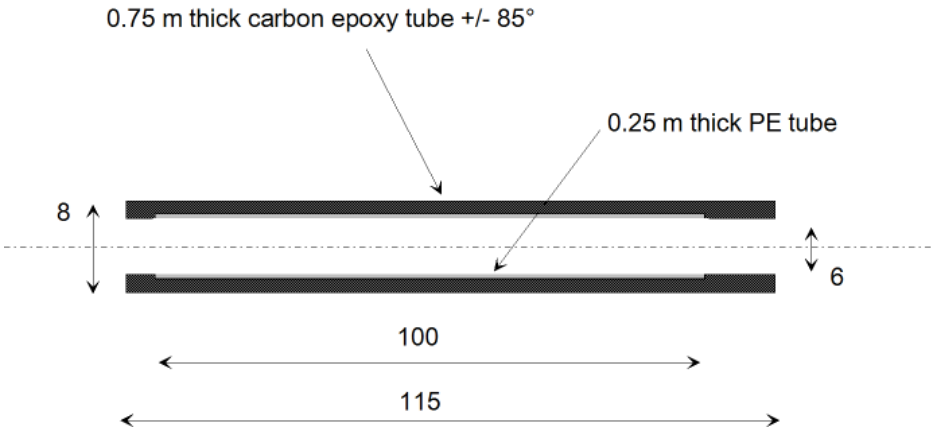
tube for hydrostatic compression (dimensions in mm)
